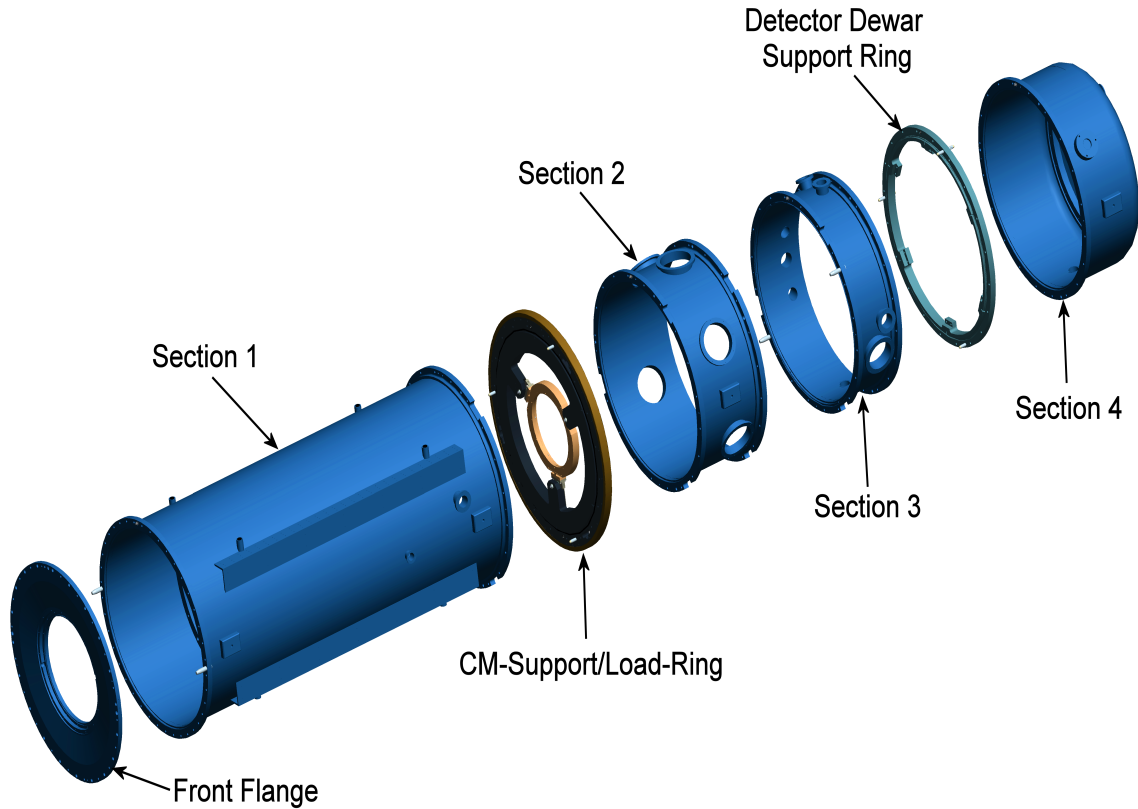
Exploded view of the vessel sections. All the circular parts are made from rolled and seam-welded 6061-T6 aluminum sheet. The window field lens assembly mounts on the Front Flange. The CM-Support/Load-Ring, referred to as the Load Ring in Figure 1, is aligned with the center of gravity of the CM. The holes in Section 2 are access ports for the cold clamps, temperature and pressure sensor plugs, and pump attachment hardware. The holes in the center of section 3 are aligned with the focal plane mechanisms; the various holes shown are for motor feedthroughs and hermetic electrical connectors.
